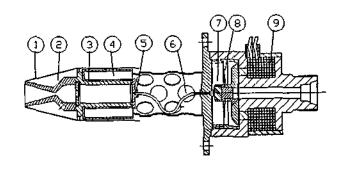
Thruster assembly. 1: Radiation shield; 2: Nozzle; 3: Catalytic chamber; 4: Heater; 5: Injector head; 6: Capilary tube; 7: Valve seat; 8: Spring; 9: Coil.
